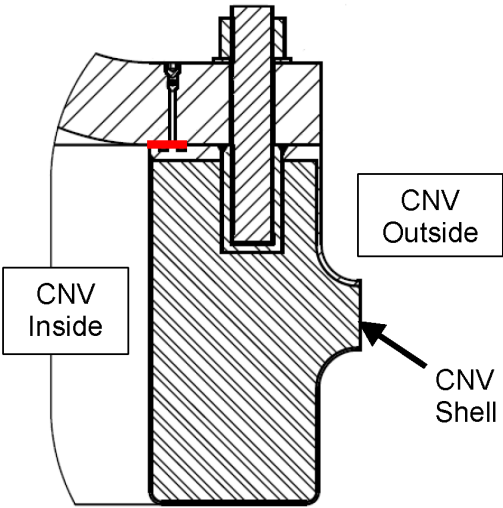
Pressurizer heater access (CNV31) flange and cover bolted opening.
